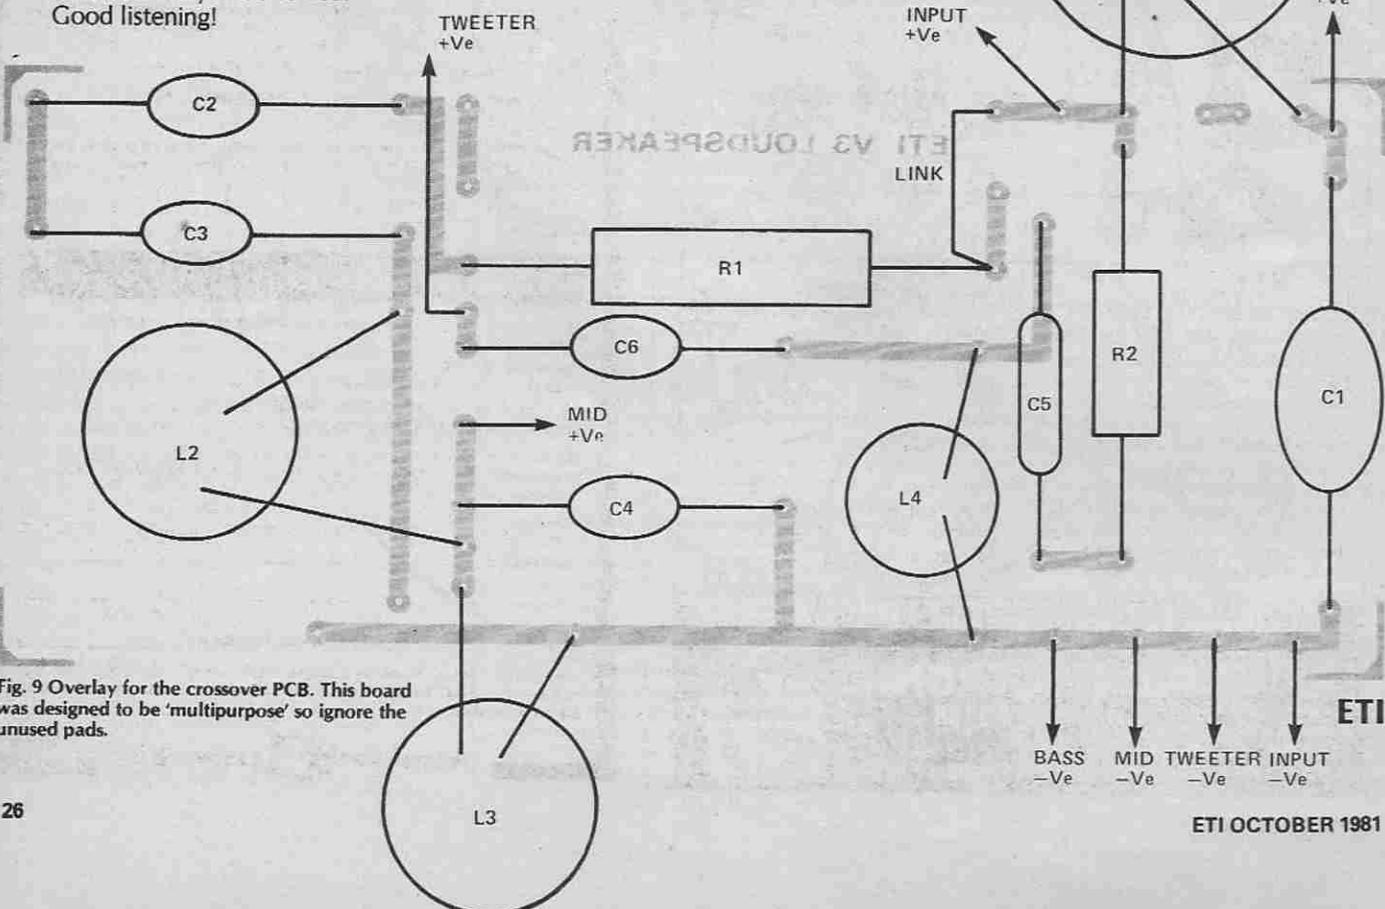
Overlay for the crossover PCB. This board was designed to be 'multipurpose' so ignore the unused pads.
